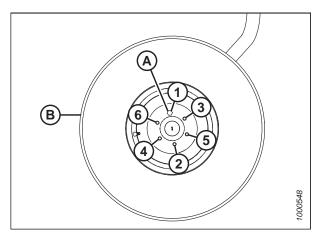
Formed Caster Wheel Bolt Tightening Sequence
